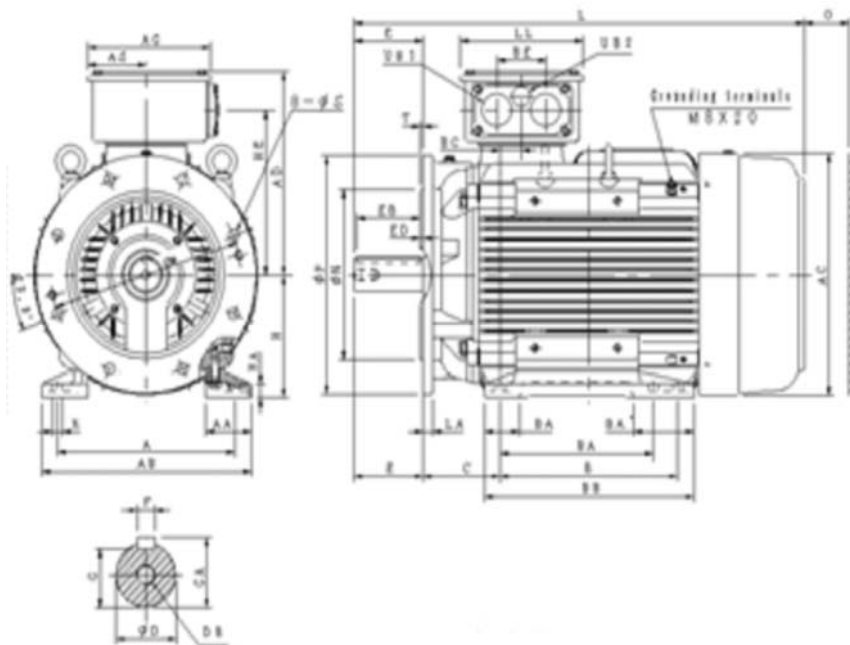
Outline drawing of cast iron design, mounting B35; frame size 200 - 250
